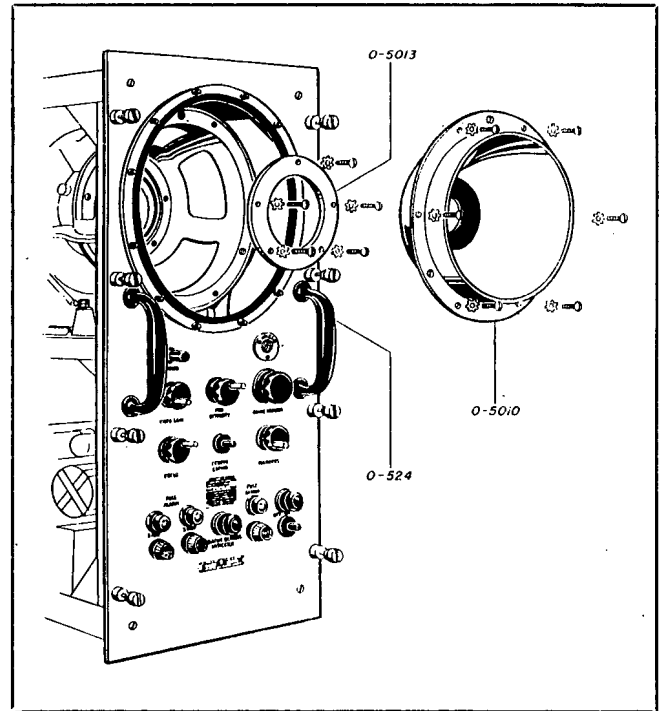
Removing PPI Tube Shield and Retaining Ring
